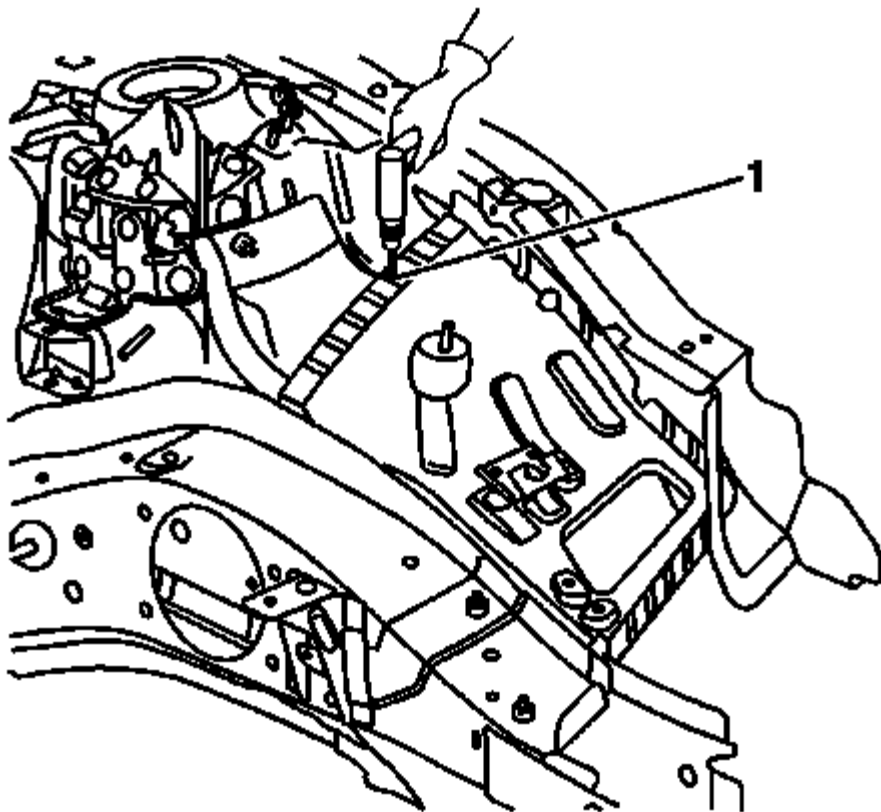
Drilling Out Front Wheelhouse Front Panel Factory Welds
